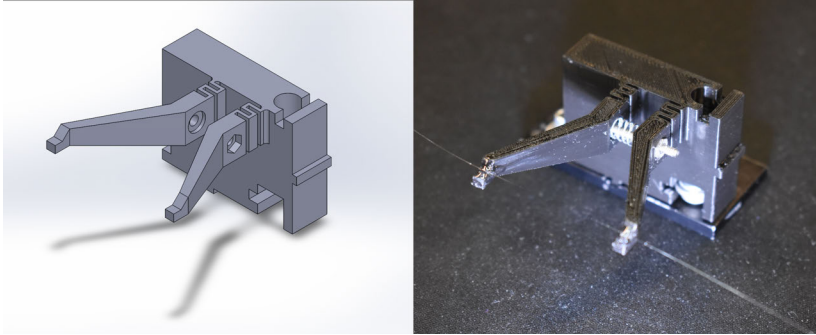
Custom fiber holder for removing fibers and positioning them for coupling. At left is a model of the component, and at right is shown the 3D printed component with a dimpled fiber attached.
